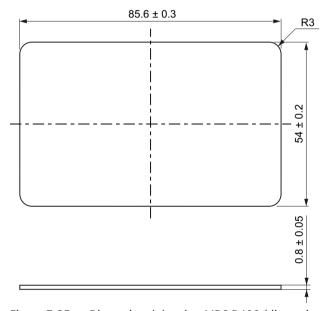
Dimensional drawing MDS D400 (dimensions in mm)
